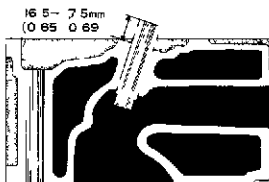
12 Valve Stem Guide X4933 Extrusion (Exhaust)
